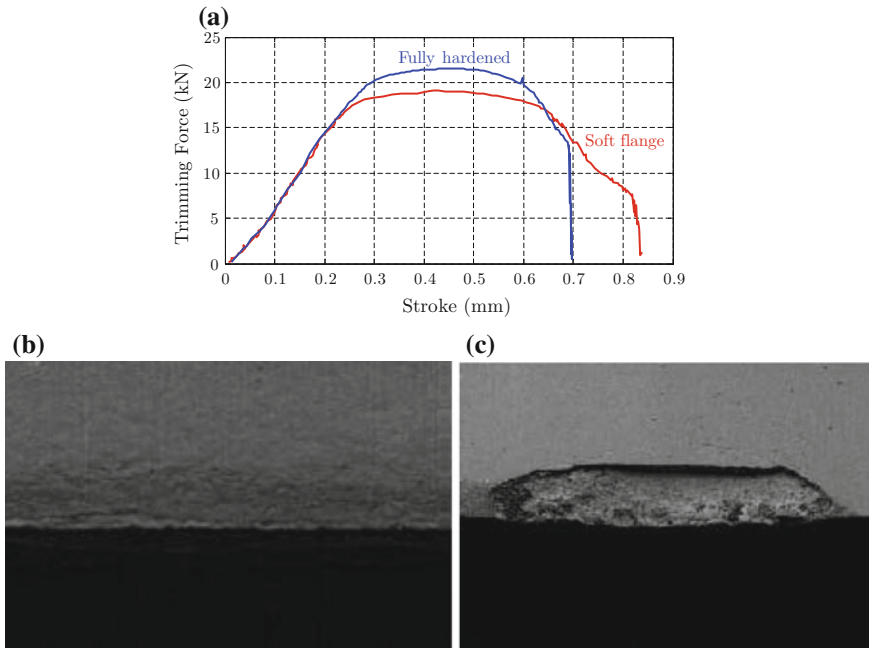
Soft flange trimming versus full hard trimming: a punch force–stroke comparison, trimming edge tool after b 50 soft flange trimming, c 25 full hard trimming (re-created after [110])
